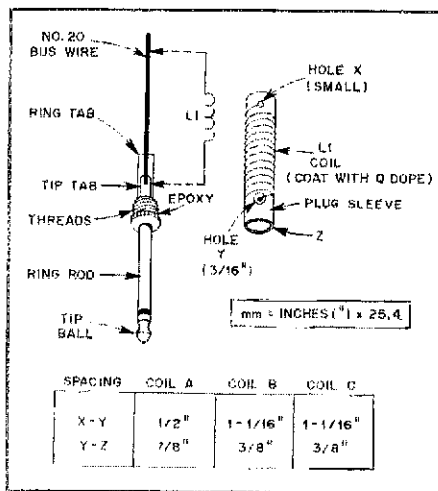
Assembly and modification details of the PL-55 style of phone plug used for plug-in coils A, B and C. Do not exert undue pressure on the plug insulating sleeve when drilling holes X and Y, lest the plastic cracks. Drill a no. 60 pilot hole at each point before applying a larger drill bit. See text for additional data.
